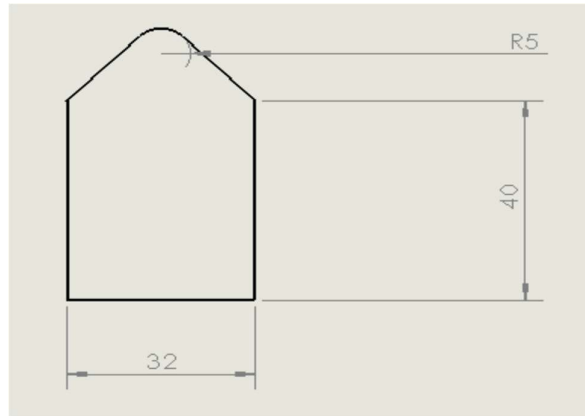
Schematic view of Indenter Version Final
